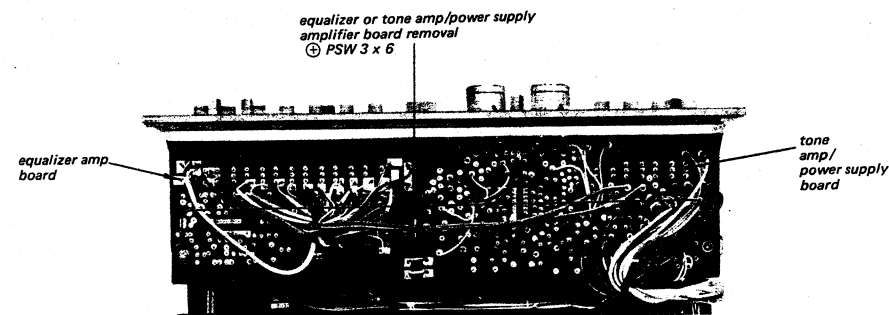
Equalizer and tone amplifier/power supply board removal
